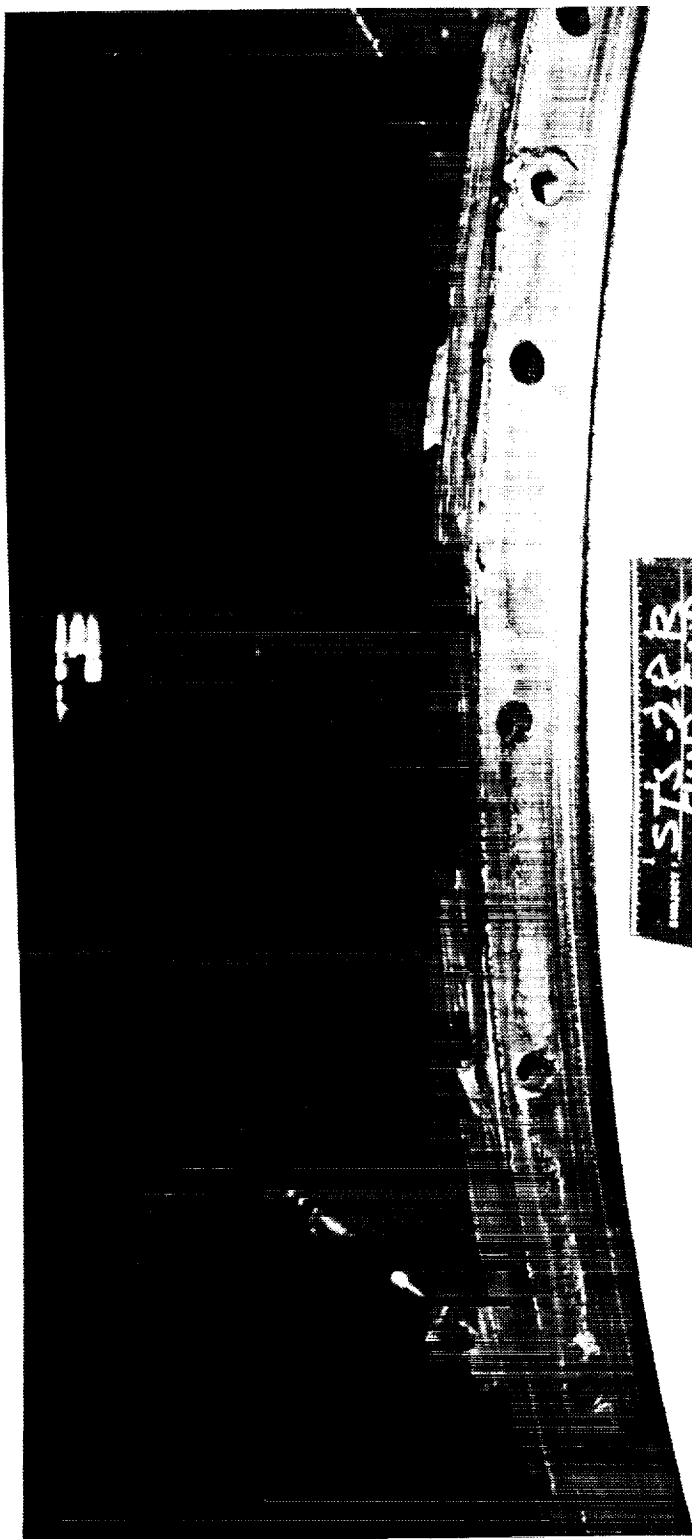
STS-28B Bearing Forward End Ring (120 deg)
